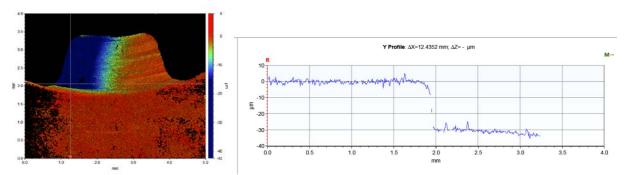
Turbo Thrust Plate: 3D Journal Bearing Side
